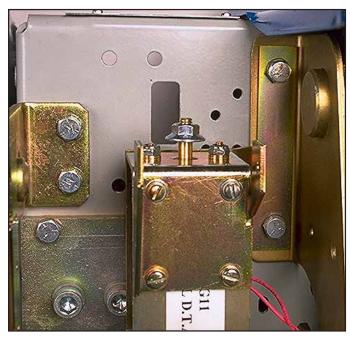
DTA Assembly Mounted to the Breaker Shelf.
